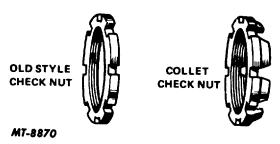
Air Chamber Tube Spanner (Check) Nut
